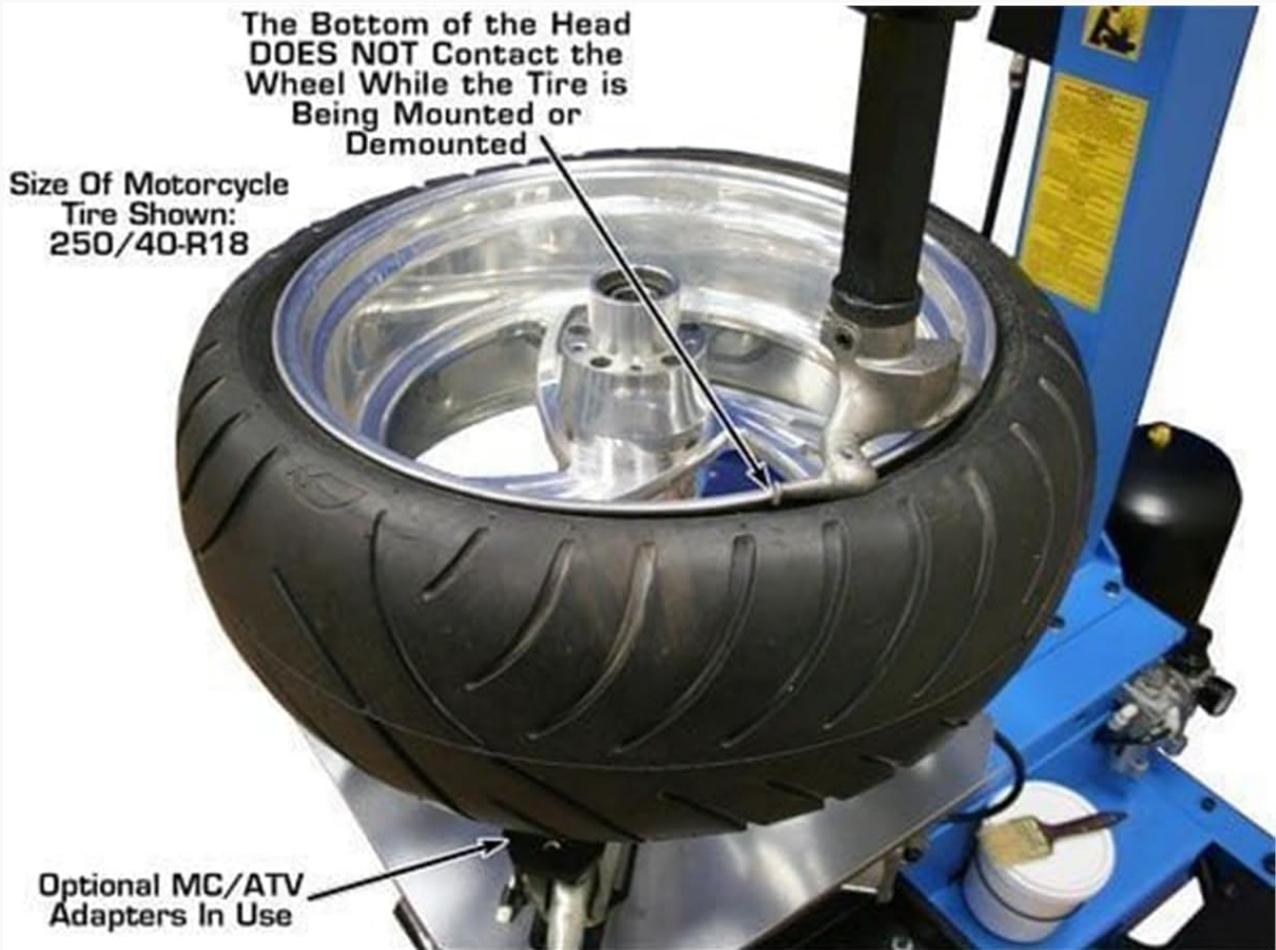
Close-up view demonstrating that the bottom of the mounting head should not contact the wheel during tire mounting or demounting. A motorcycle tire is shown with optional MC/ATV adapters.
